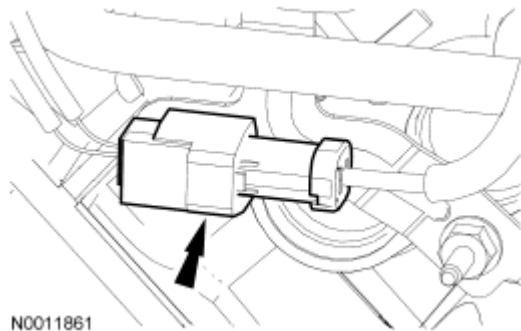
Locating Knock Sensor (KS) Electrical Connector And Pin-Type Retainer
